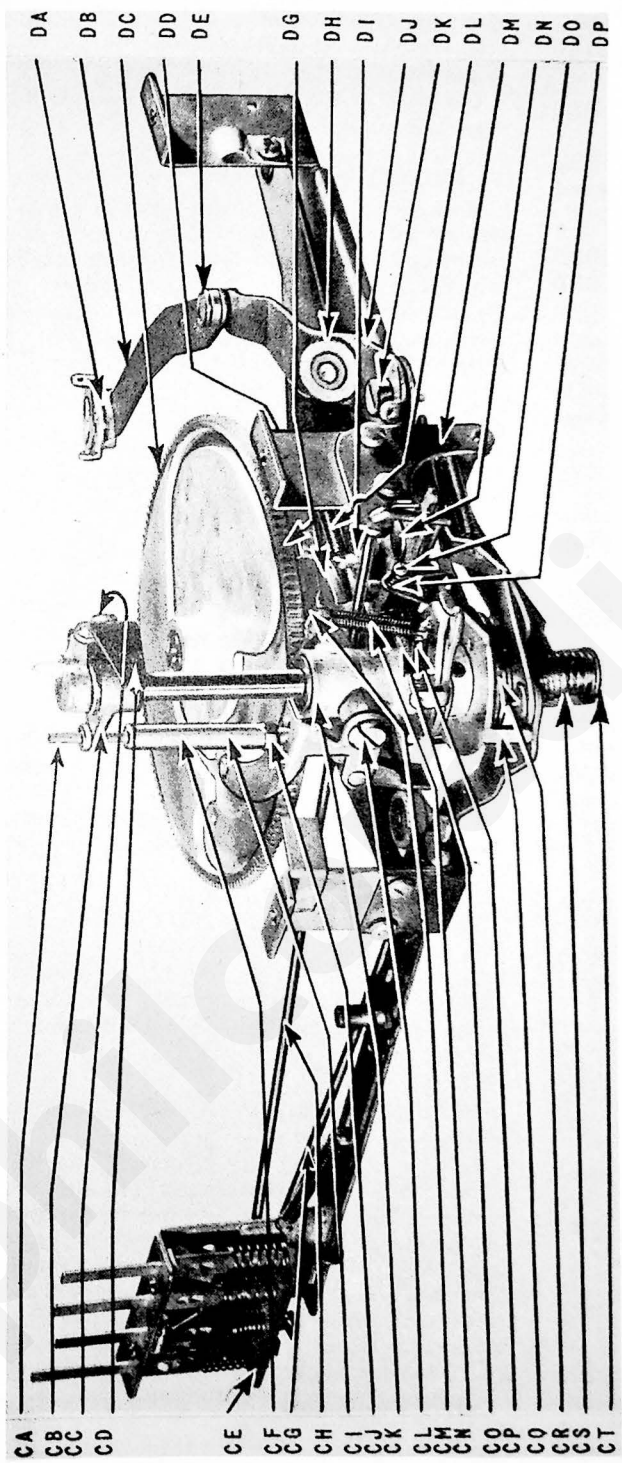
PHOTO C-D. VIEW OF SUB-PLATE ASSEMBLY, TOGETHER WITH CERTAIN OTHER ASSEMBLIES.
